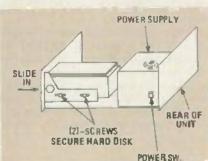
MOUNTING THE HARD DISK and power supply is straightforward.
